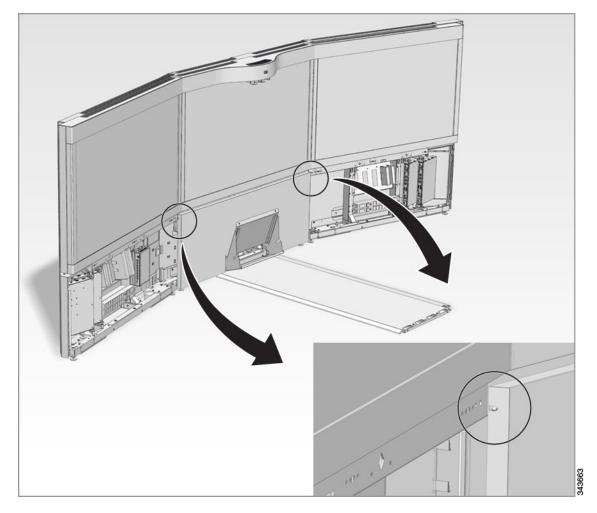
Installing the Front Center Facade Panel (3 of 3)—Alignment Pin Detail
